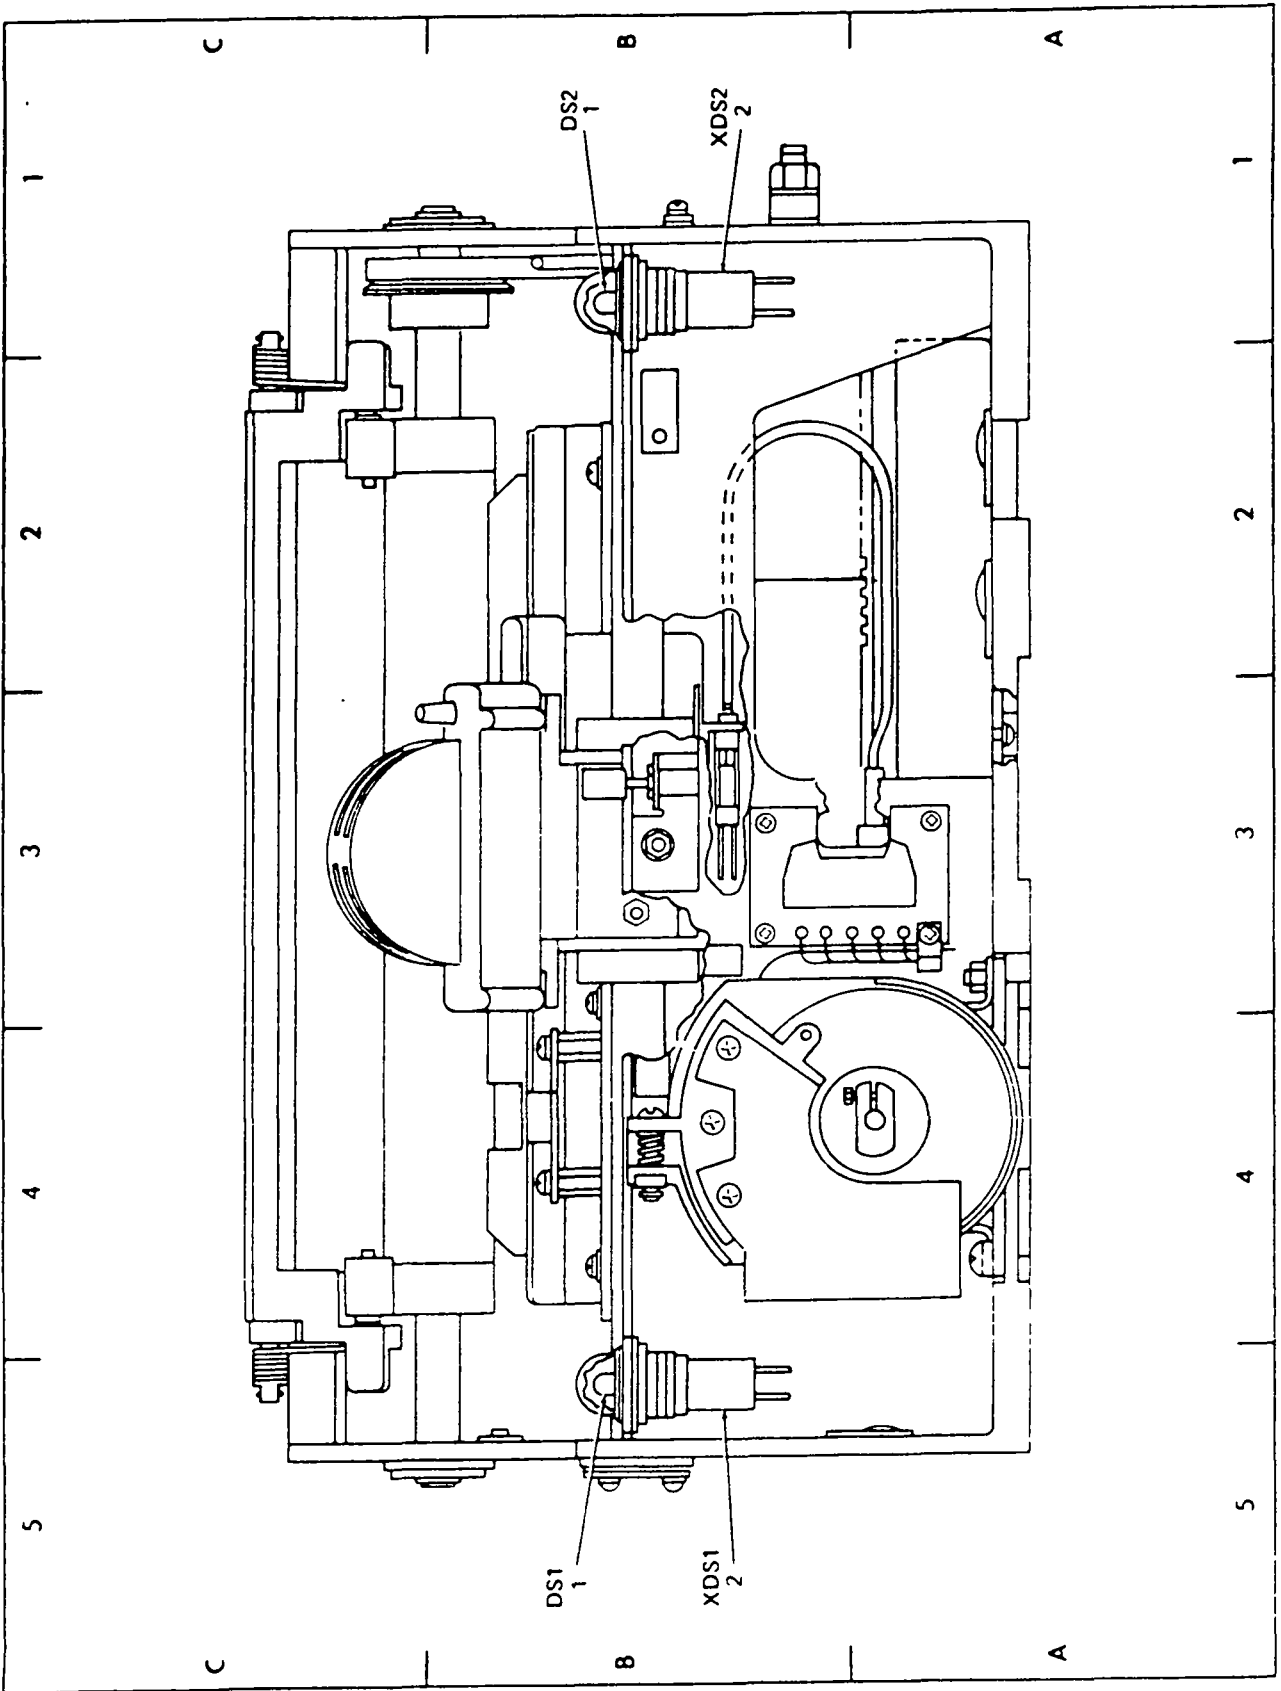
Teleprinter Subassembly (Sheet 1 of 5)
